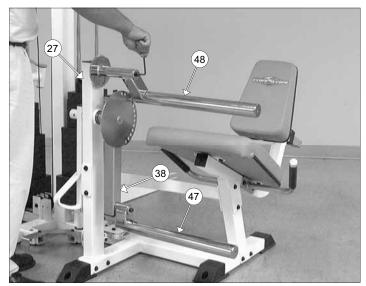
Next, attach the Top Adjustable Leg Holder Tube (#48) to the Leg Extension Front Frame (#27) using one Button Head Socket Cap Screw 3/8-16 X 1 (#71), one Split Lock Washer 3/8" (#152), and one Chrome Washer 3/8 X 1 1/2 (#74). Next, attach the Swivel Foam Roll Tube (#47) to the Pivot-Arm (#38) using one Button Head Socket Cap Screw 3/8-16 X 1 (#71), one Split Lock Washer 3/8" (#152), and one Chrome Washer 3/8 X 1 1/2 (#74).
